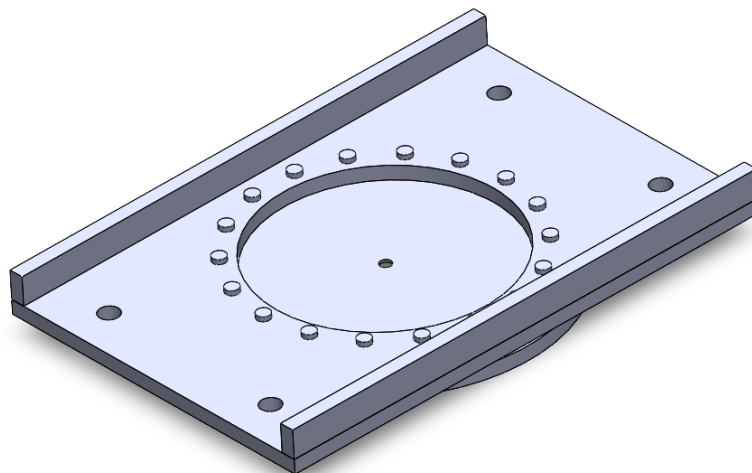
CAD Model of the Testing Jig (SolidWorks)
